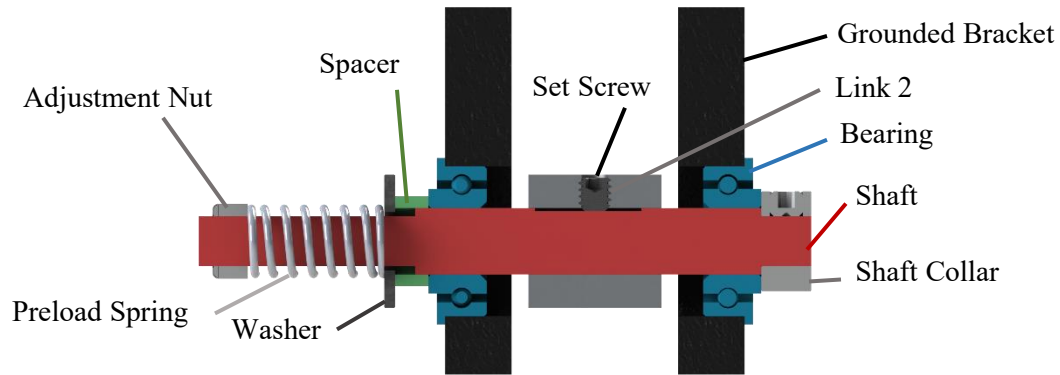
The second iteration of the pivot bearing assembly. A spring was added along the axis of the shaft to address slop from the bearings as well as to limit axial movement.
